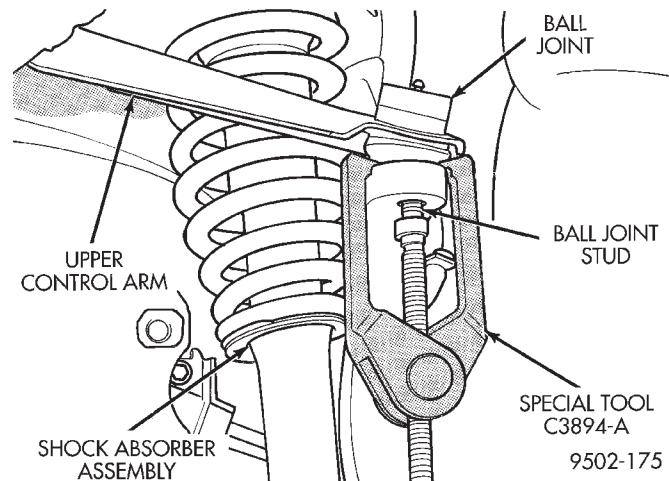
Ball Joint Stud Removal From Steering Knuckle
